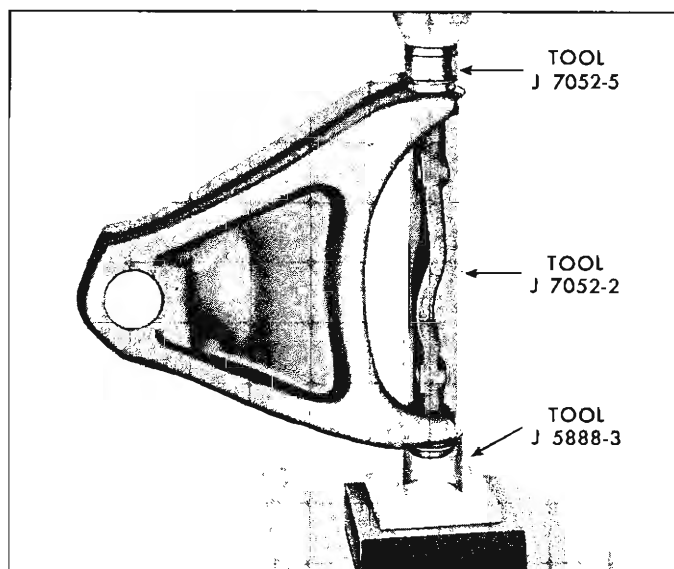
Installing Upper Control Arm Cross Shaft Bushing
